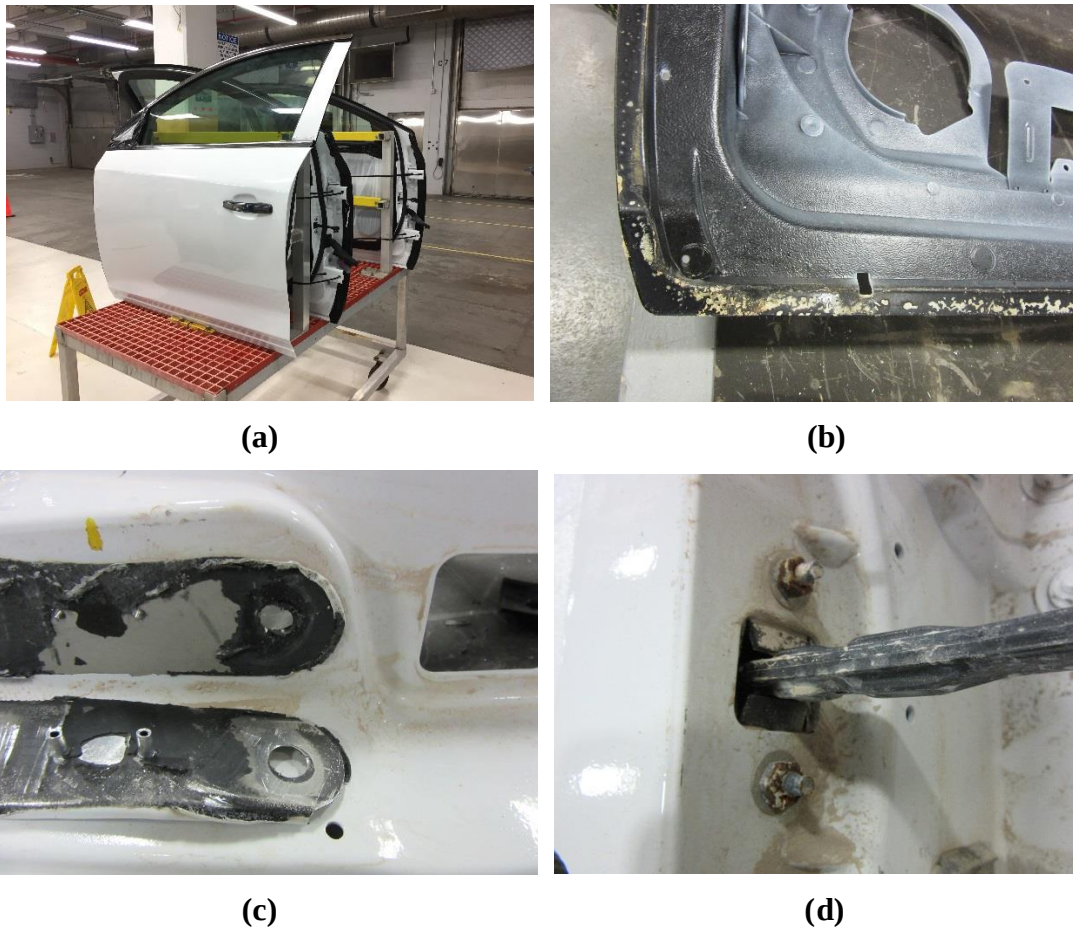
Photographs of corrosion-test doors. (a) Doors mounted on cart prior to exposures. (b) Aft lower corner of inner panel. (c) Hinge mount including adhesive-backed aluminum isolator, and square hole for wiring. (d) Nuts on checklink mounting screws show red rust. Note: (b), (c), and (d) show a door after accelerated cyclic corrosion testing and door disassembly. The light spots along the lower edge of the door panel in (b) are bits of hem adhesive.
